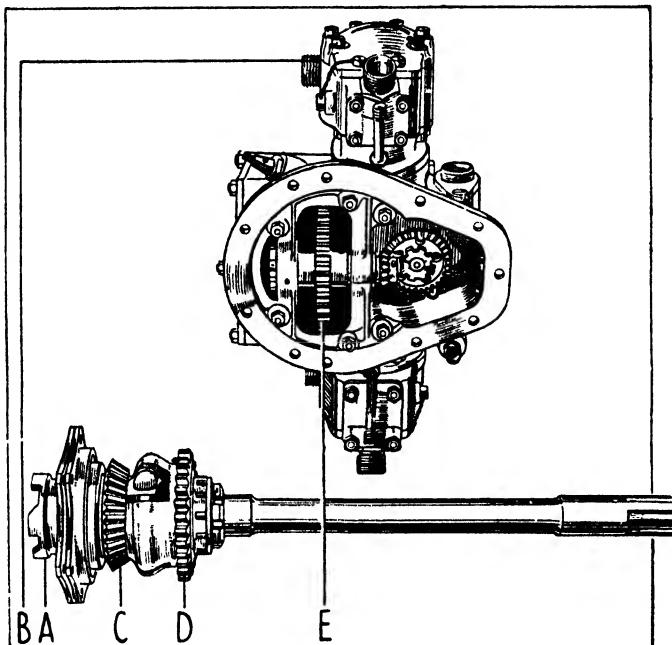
The auxiliary drives box and rear drive shaft. "A" the starter dog ; "B" petrol outlet from pump ; "C" magneto driving bevel ; "D" auxiliary drive gear ; "E" auxiliary drives box driven gear.
